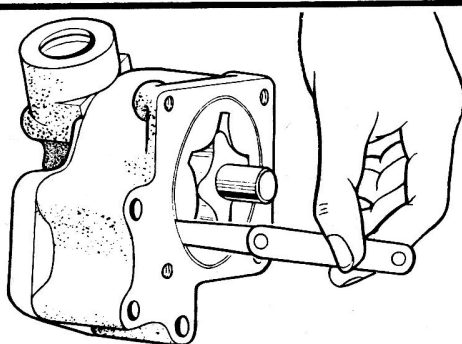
Measuring the clearance between the outer rotor and the pump body
